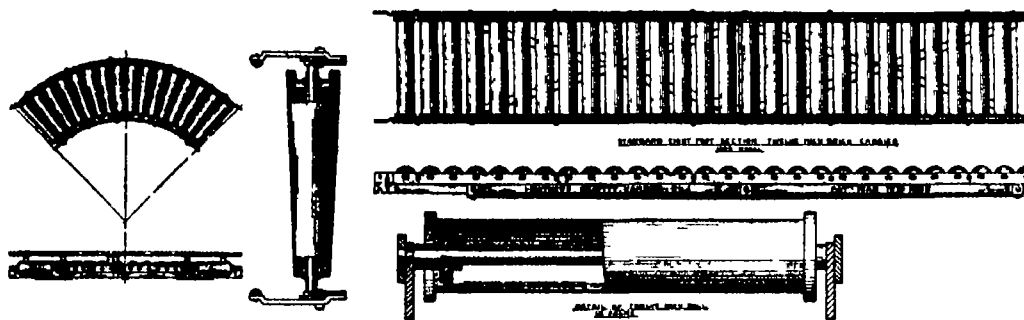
DETAILS OF CONSTRUCTION OF BRICK CARRIER SHOWING BALL BEARINGS AND THE CONICAL ROLLERS AT A CURVE
